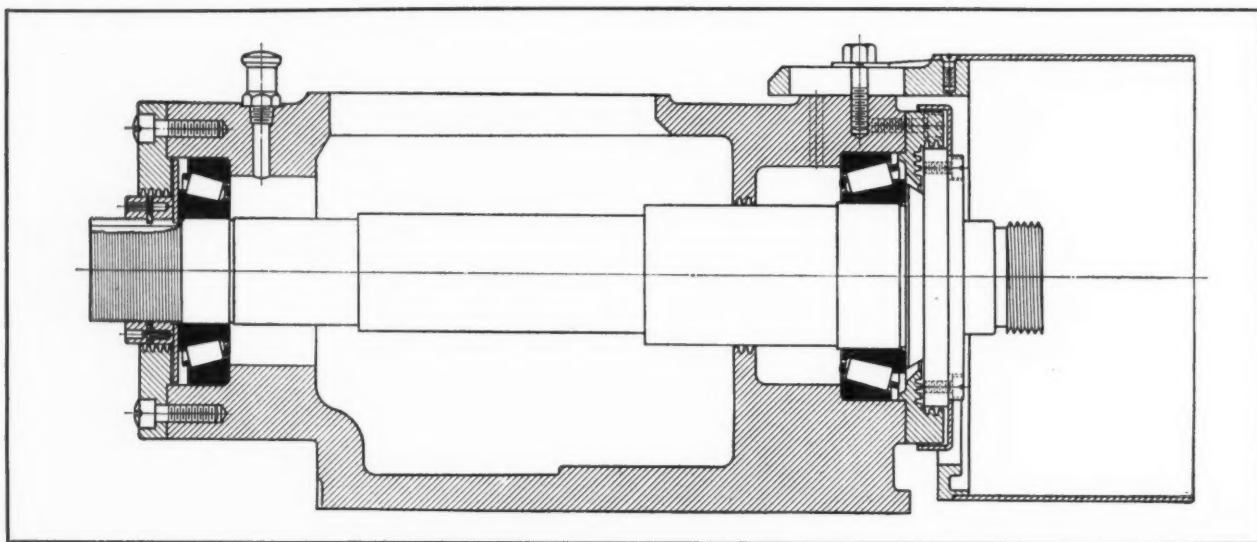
Mounting for the Work-spindle of a Grinding Machine
